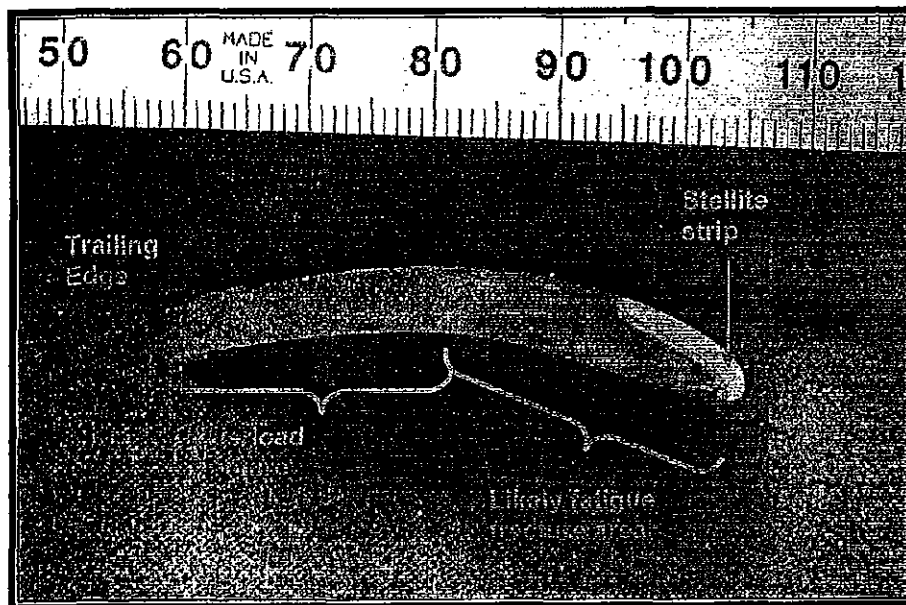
Macro photograph of fracture surface of LP-B L-2 #141 blade after opening the crack. Fracture surface was cleaned to remove thick oxide deposit. Flat fracture surface can be seen from the leading edge continuing into a fracture surface due to overload towards the trailing edge.
